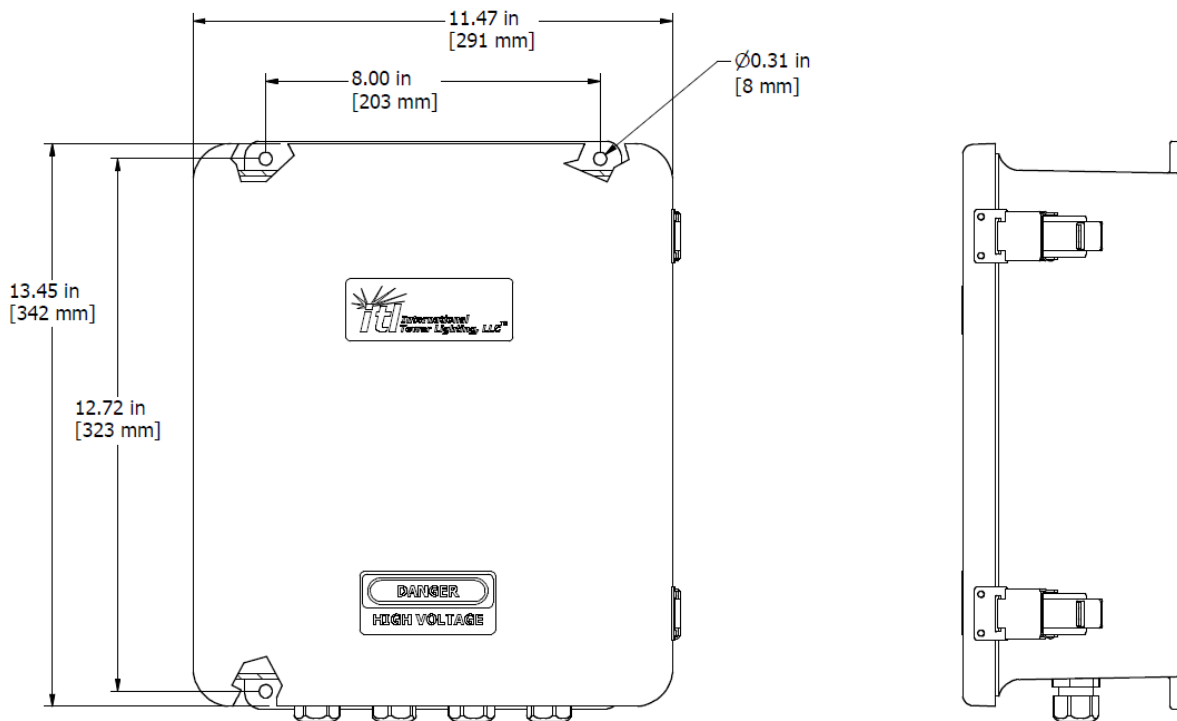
Mounting Details and Dimensions of Enclosure Panel
